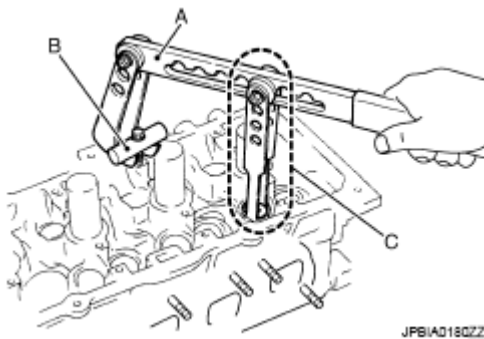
Compressing Valve Spring Using Valve Spring Compressor
